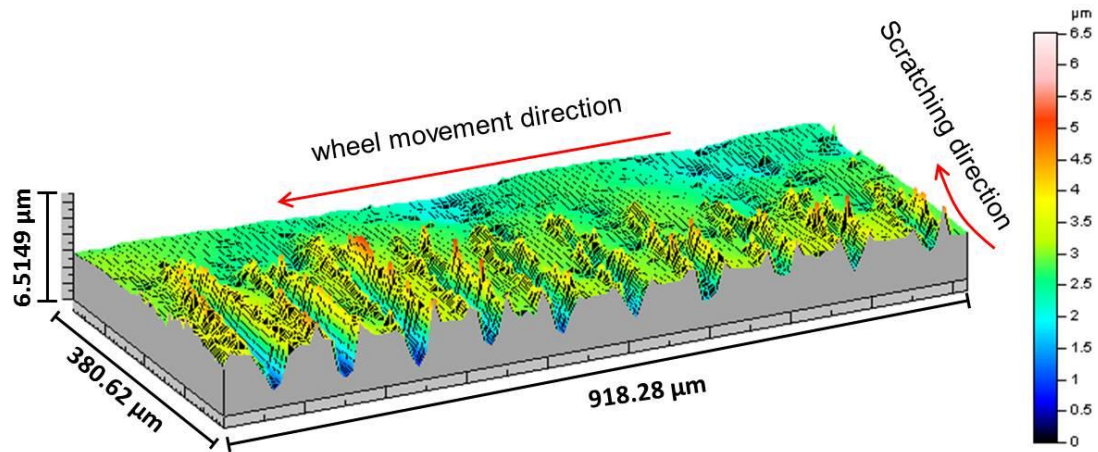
Example of 3D profile of scratches on the Inconel 718 workpiece.
